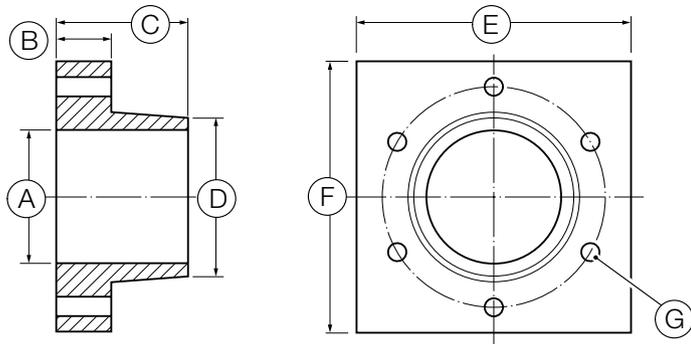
2 in NPT/BSP mounting adapter and dimensions
